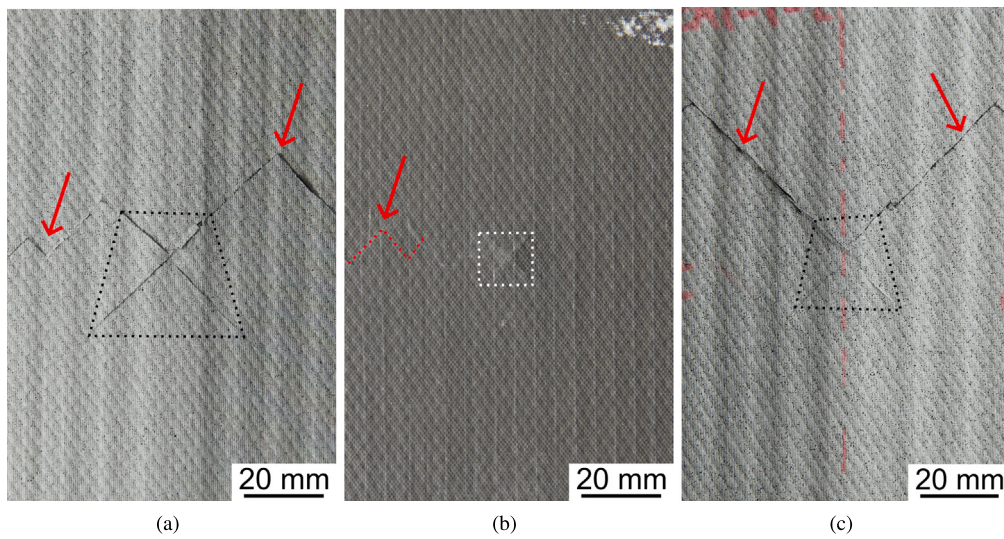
(a) impact and (b) back sides views of Taper45-5 specimen and (c) impact side view of Taper30-4 specimen.
